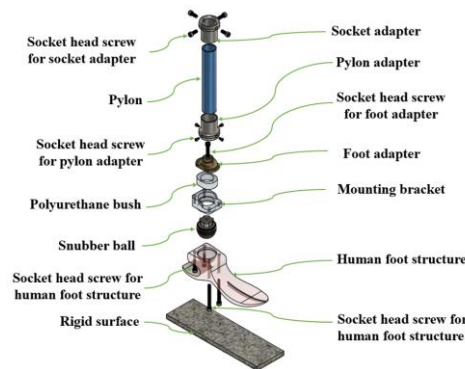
Exploded view of the multi-axial foot-ankle mechanism
